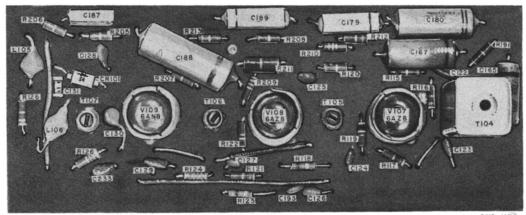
Picture I-F Printed Circuit Board-Component Side
